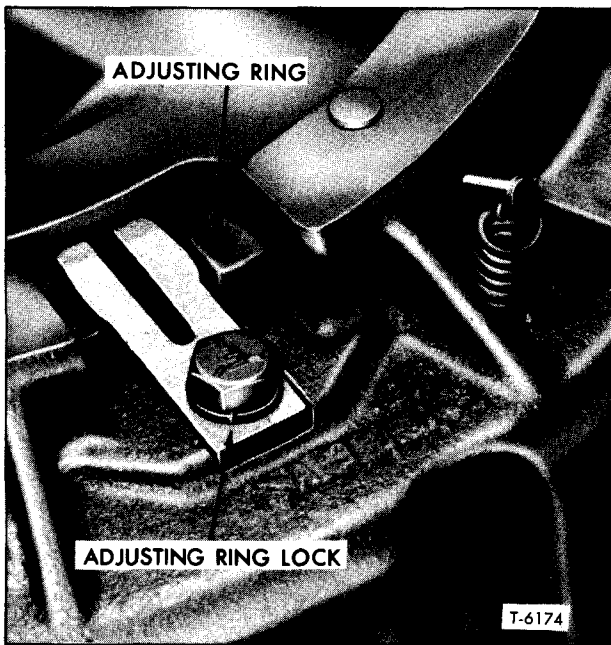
Adjusting Ring with Adjusting Ring Lock Installed
